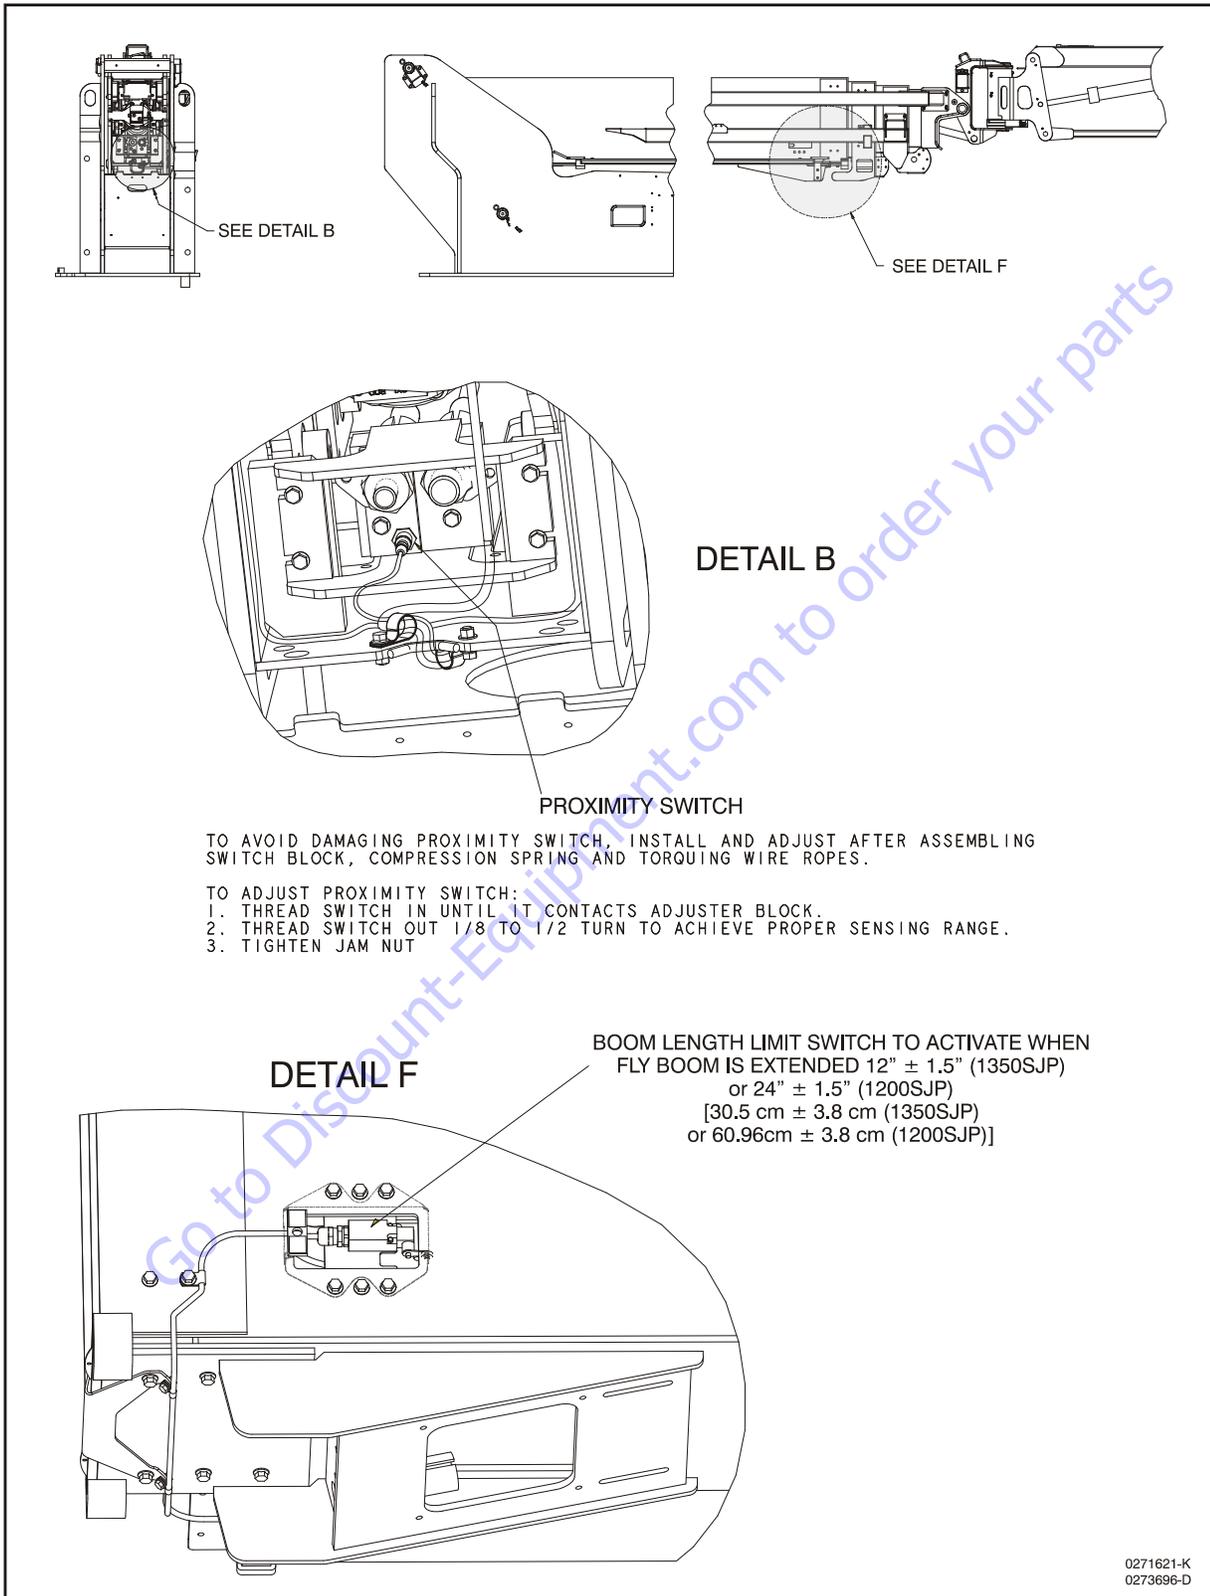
Boom/Jib Sensors and Switches Installation - Sheet 4 of 4
